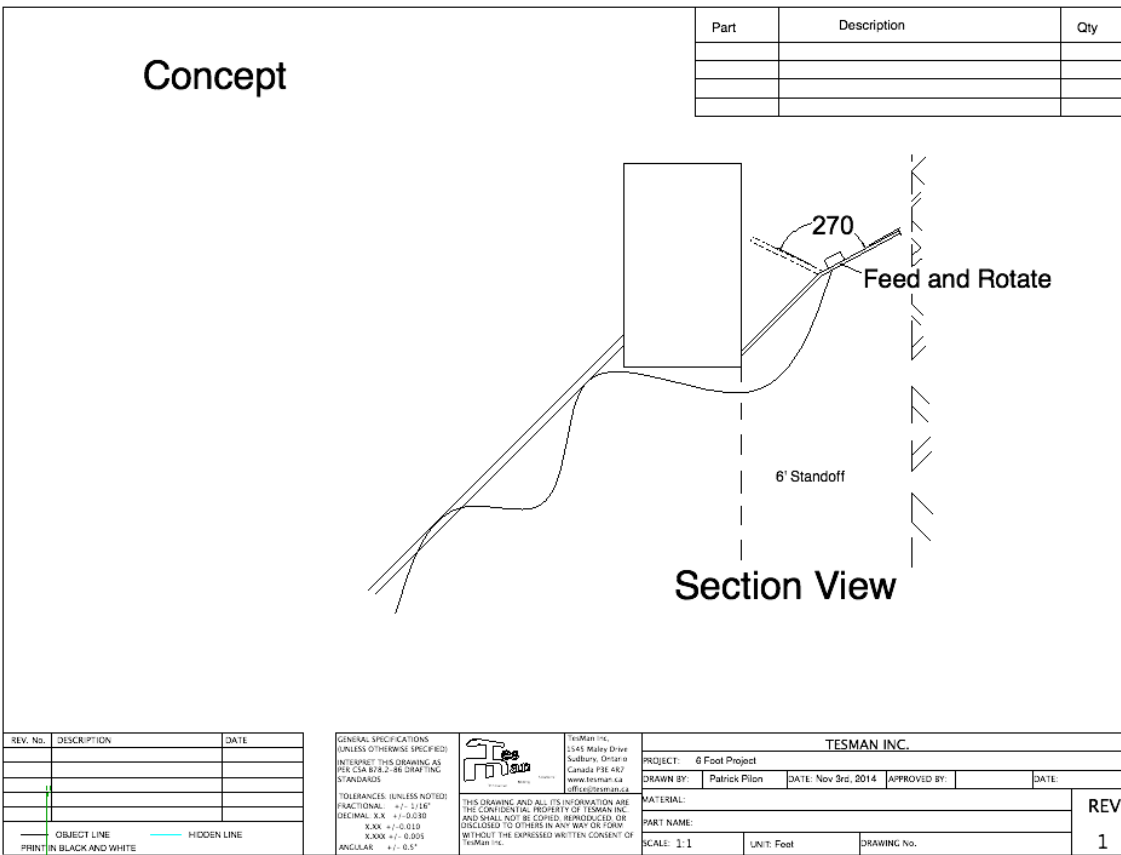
The Possible Quick Attach Format of In Hole Cleaning Tools To Be Investigated
